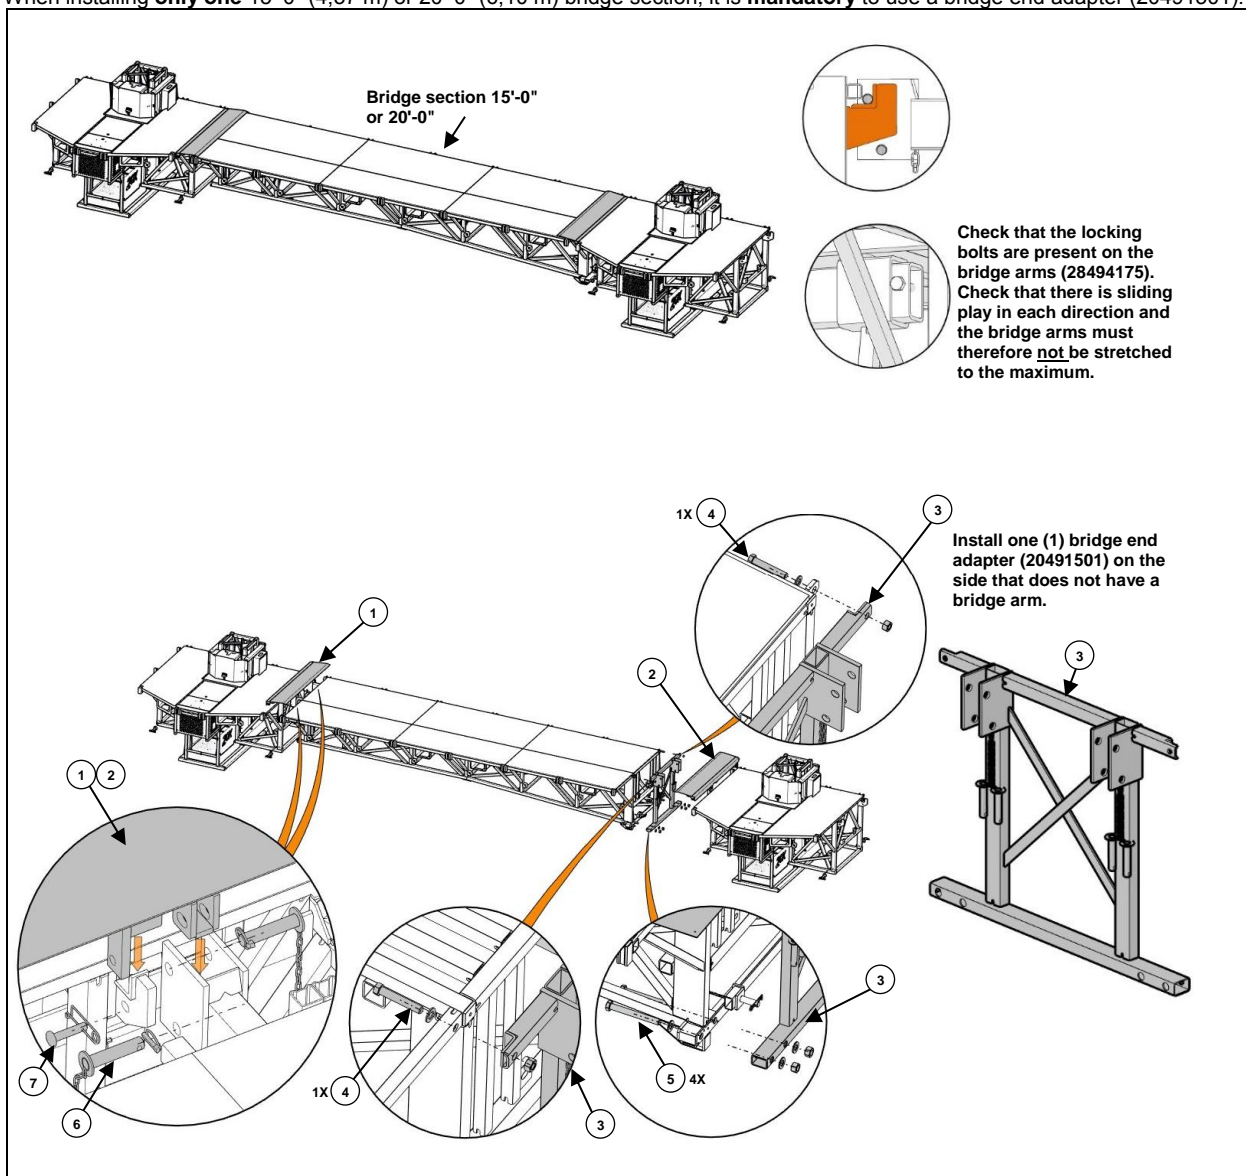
Installation of 15'-0" or 20'-0" bridge section between lifting units
